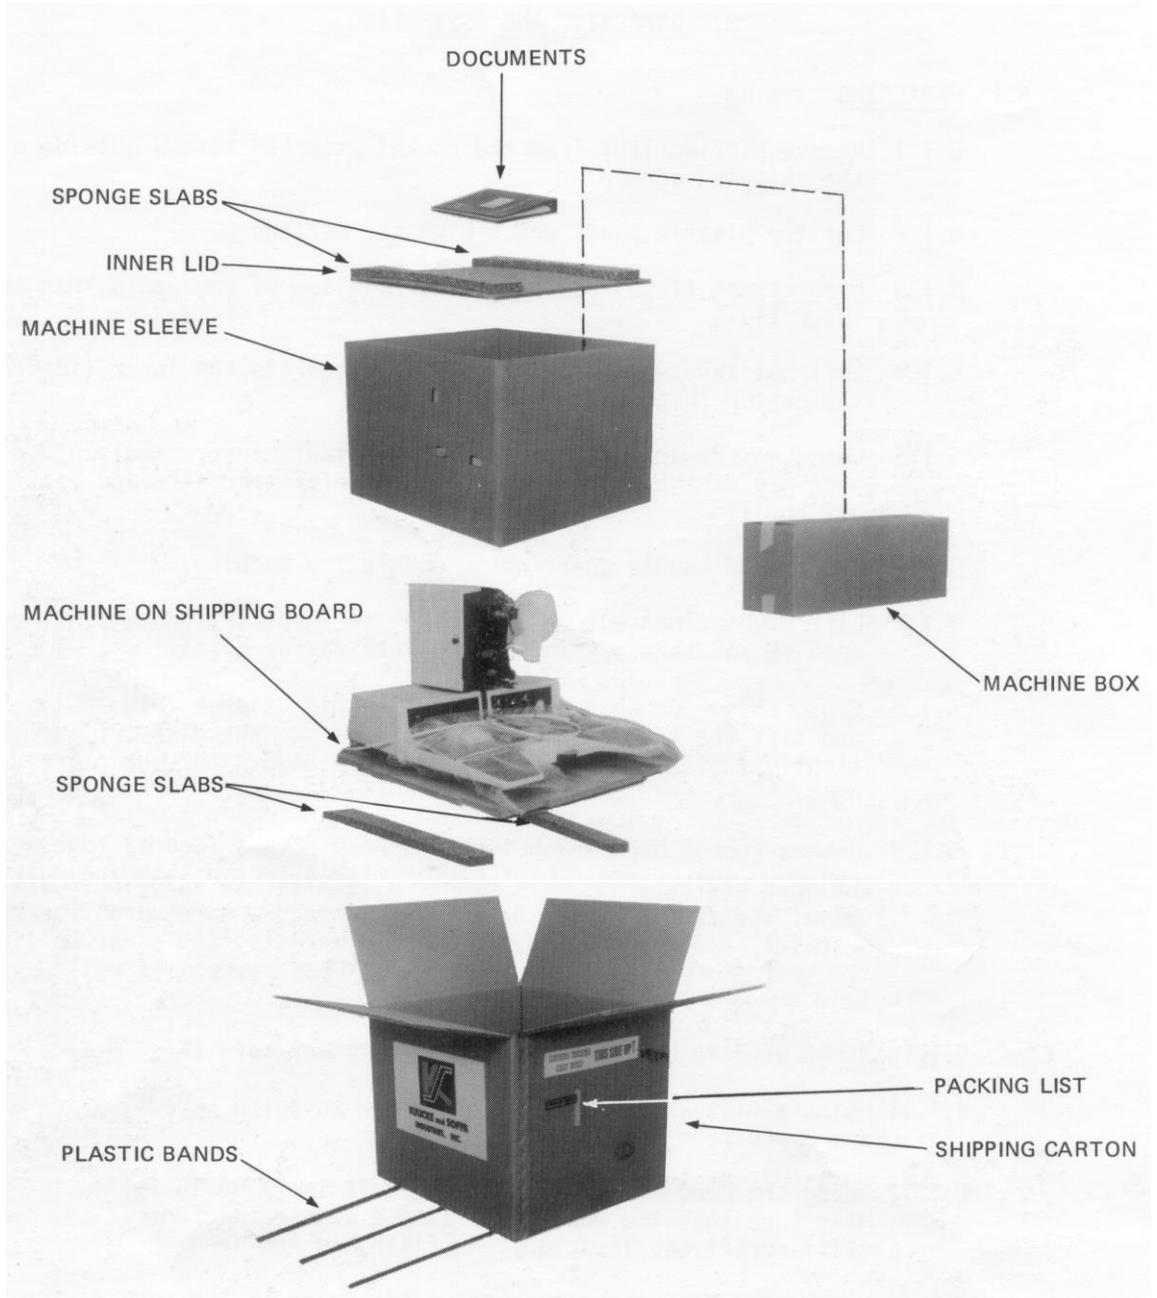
BONDER PACKAGING - EXPLODED VIEW
